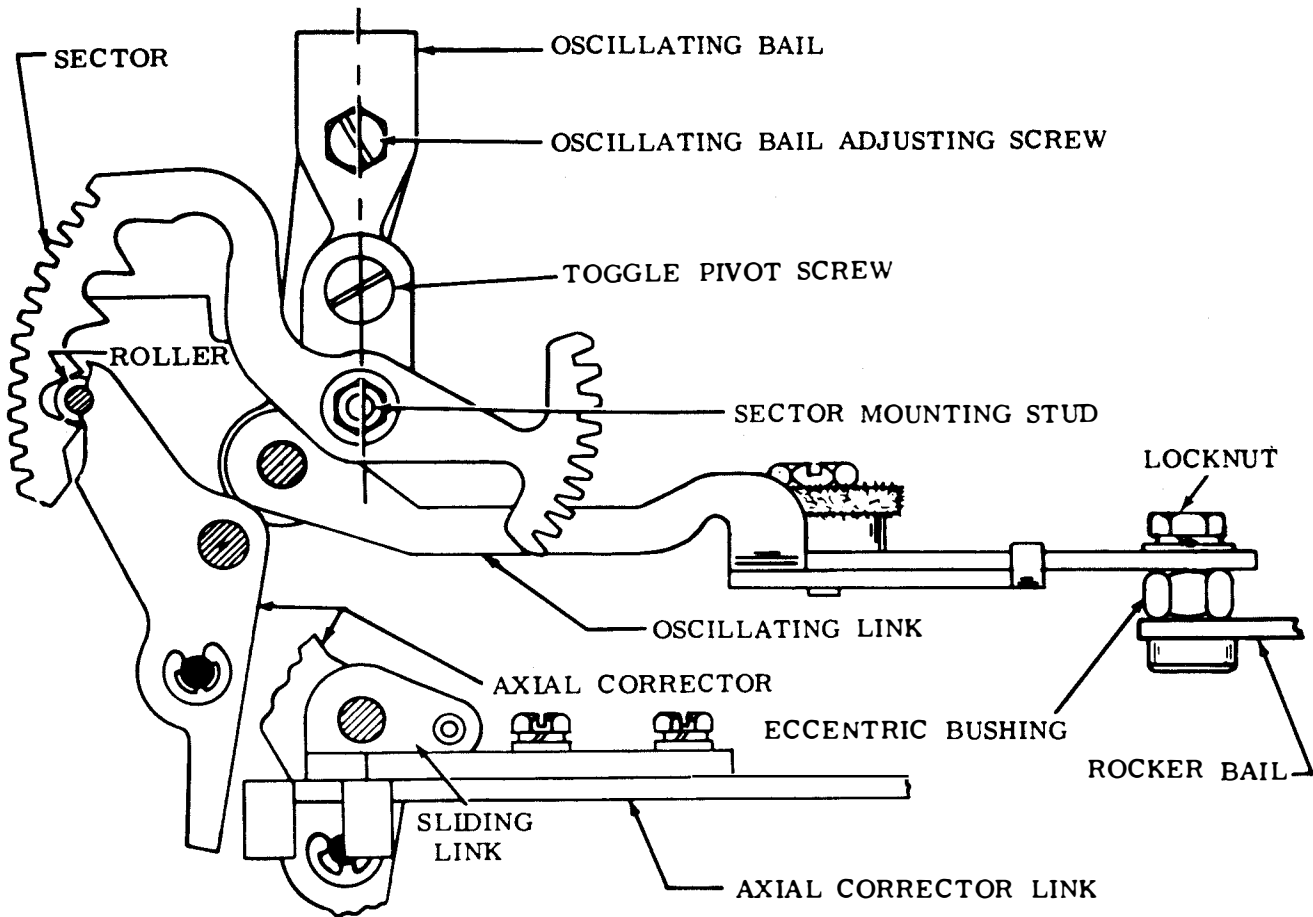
Oscillating Bail Drive Link and Oscillating Bail Pivot - Top View
